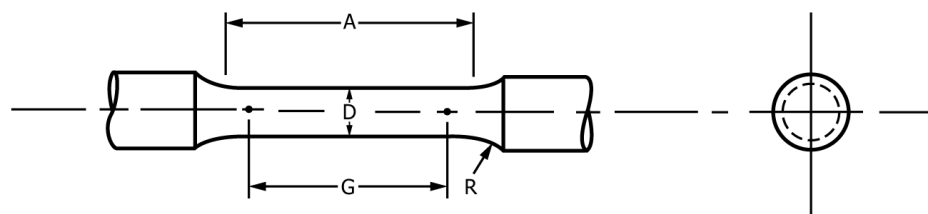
Cylindrical tensile testing specimen machined according to the ASTM E8M standard [195].
